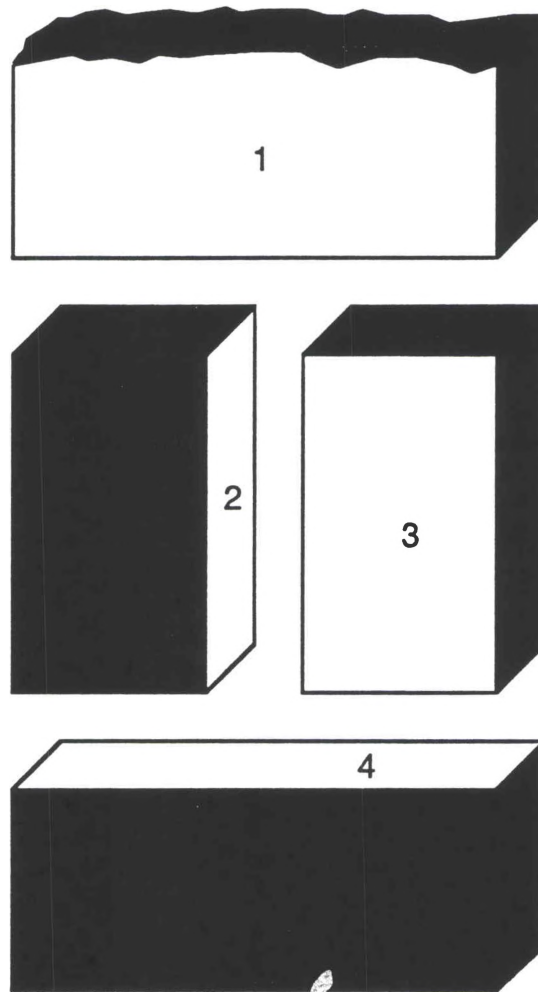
Sectioned heated zone polished surfaces: 1 - top face adjacent to fracture surface; 2 - longitudinal face; 3 - top face in gage section; 4 - transverse face.
